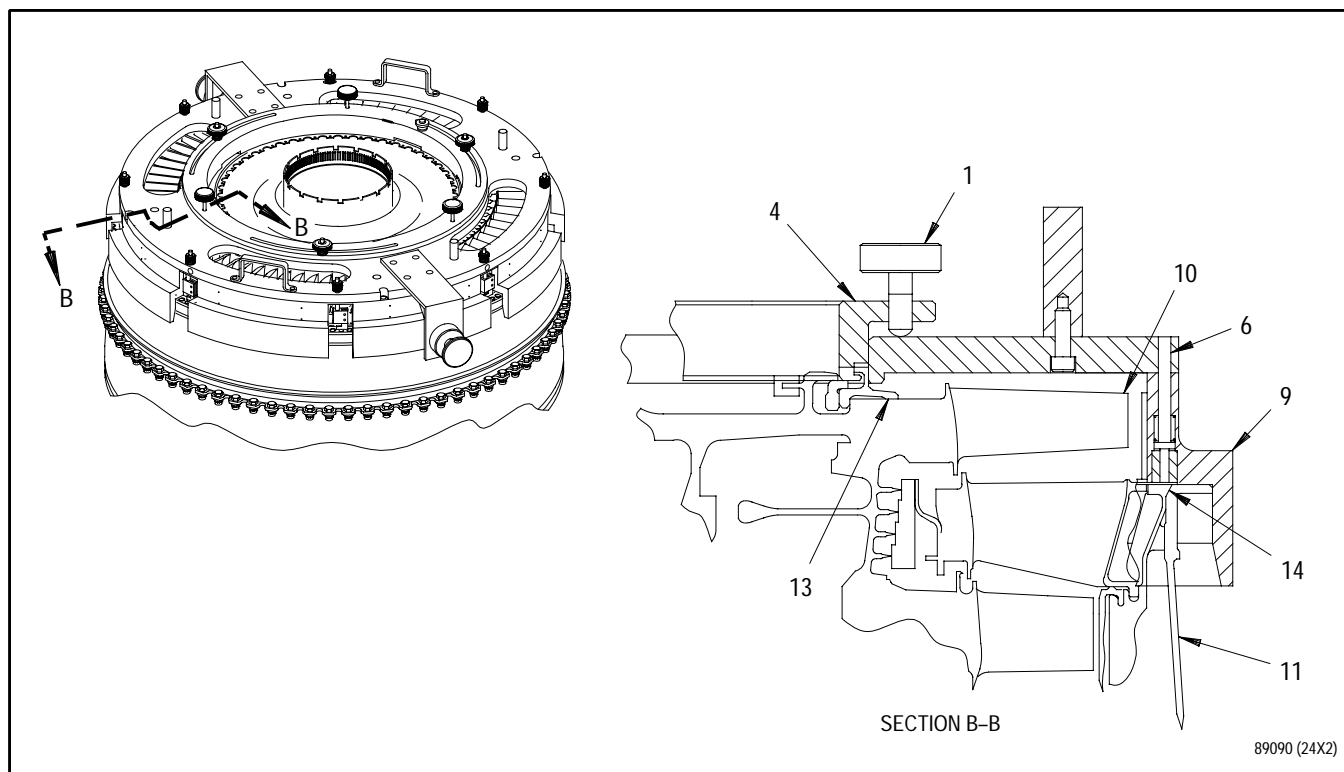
A. PWA 57920 Fixture - Installation (Sheet 2 of 2)
